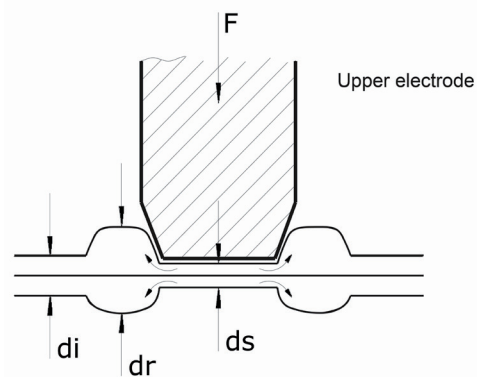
Schematic of the extrusion of the edges during welding
